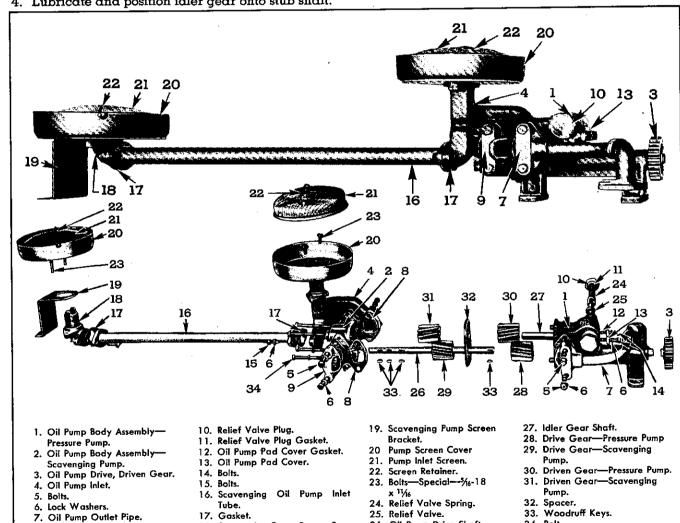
Details and Relative Location of Parts of a Six Cylinder Lubricating Oil Pump consisting of Pressure and Scavenging Pumps.
